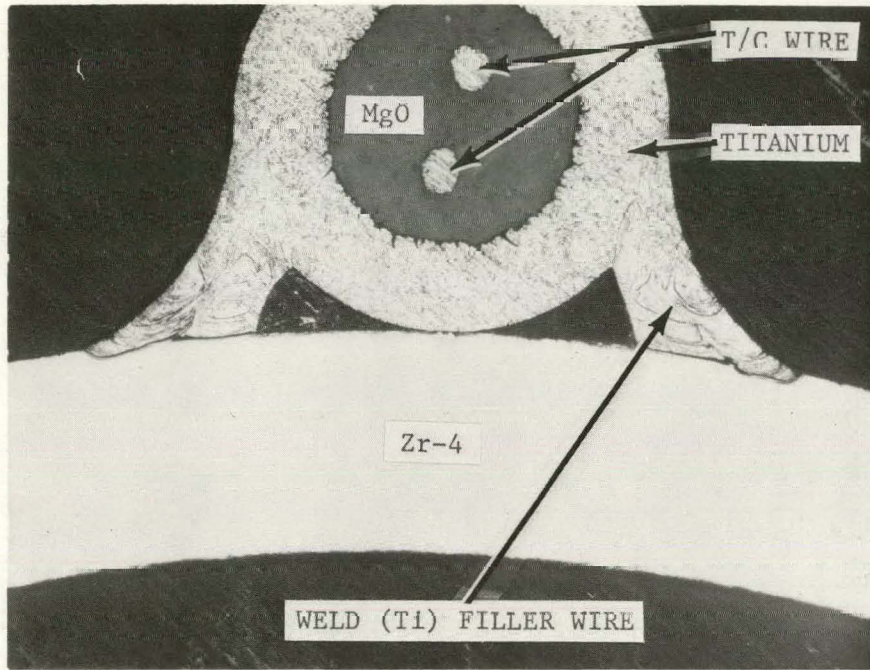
LOFT laser weld – acceptable mixing.
